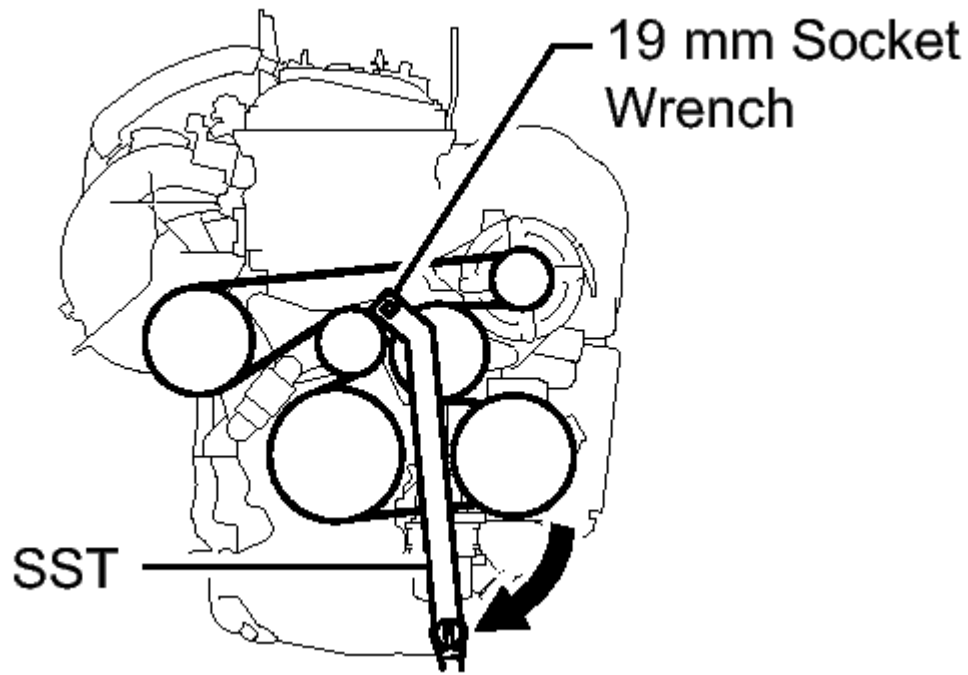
Identifying Fan And Generator V Belt & Belt Routing
